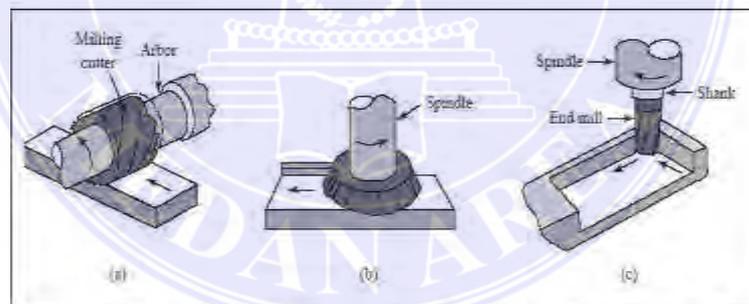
The three basic milling operations: (a) milling, (b) face milling, (c) end milling
